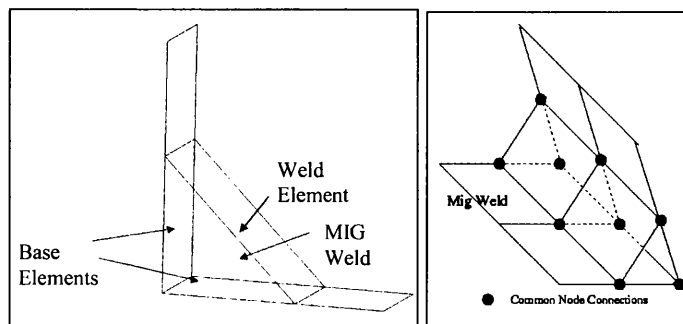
Diagram Showing How a Weld in MSC Patran is Constructed and a Typical MIG Weld
